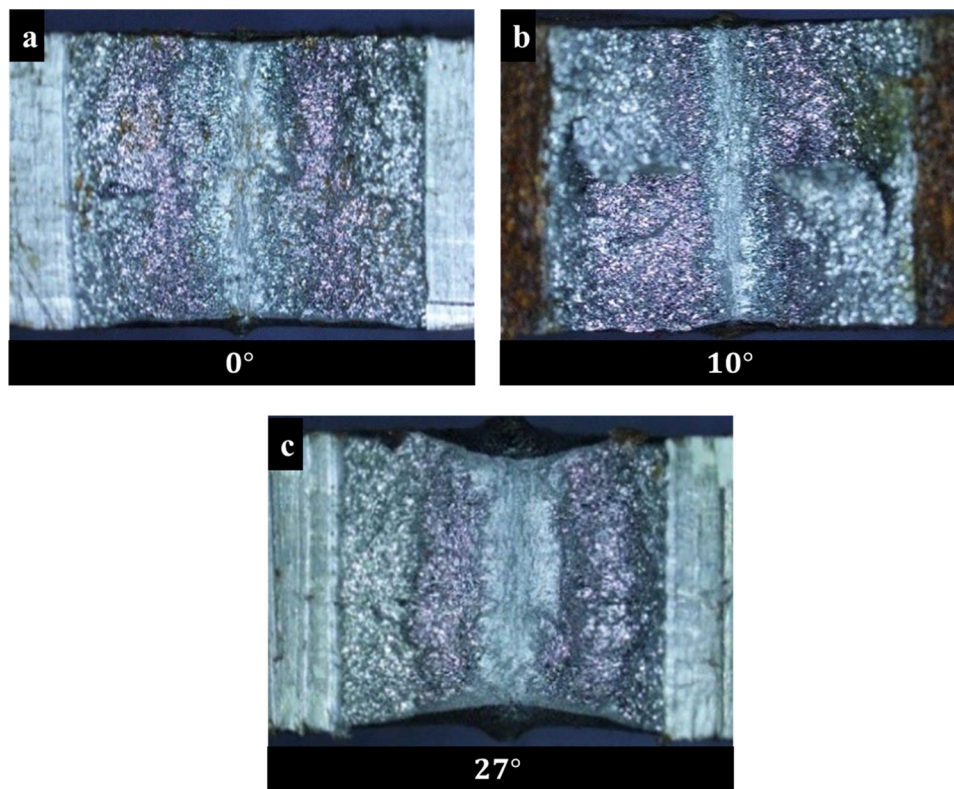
Condition of broken surface specimens of impact welded at a temperature of: (a) 0°C, (b) 10°C and (c) 27°C.
